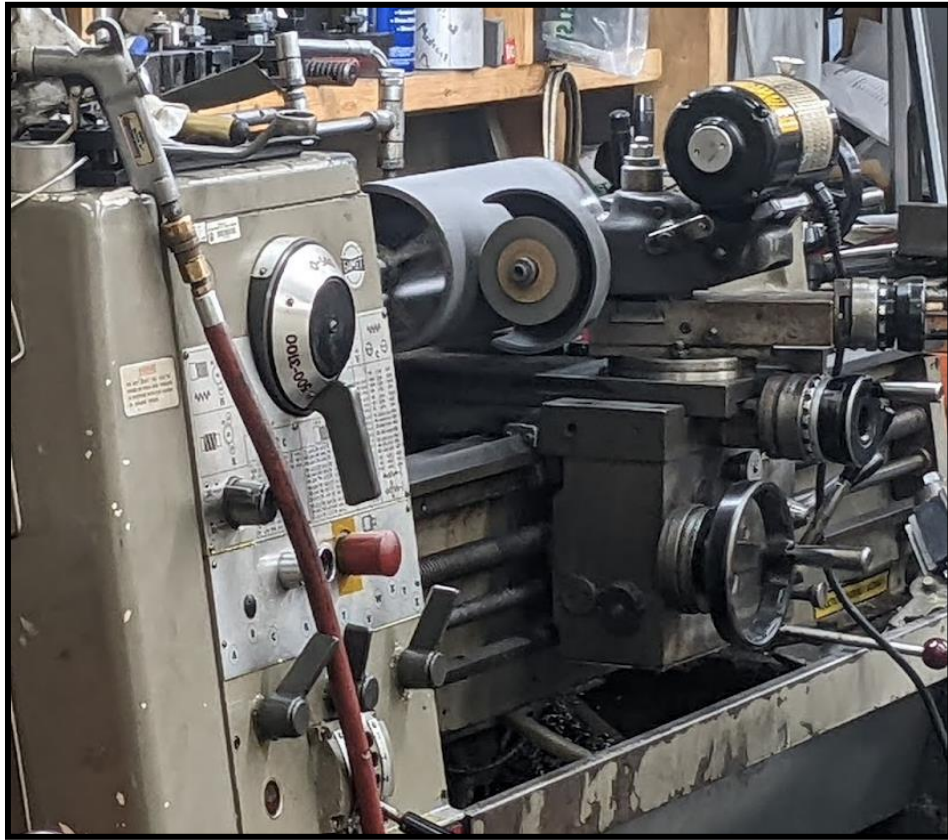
Precision grinding of air bearing journals and CRFP body of upgraded idler roller
